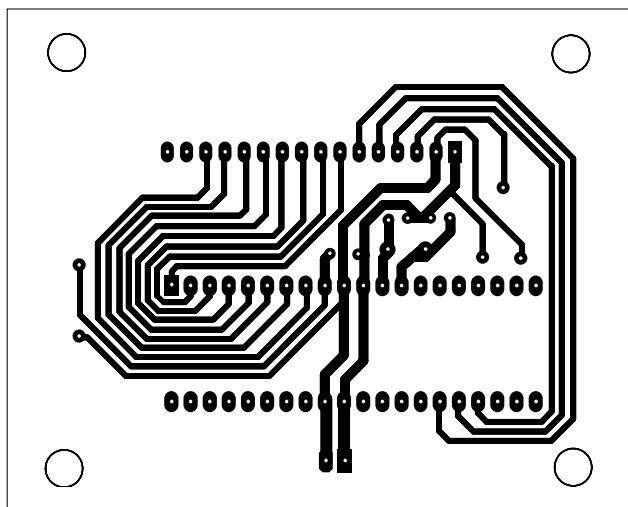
Actual-size, single-side PCB layout for message display on LCD
